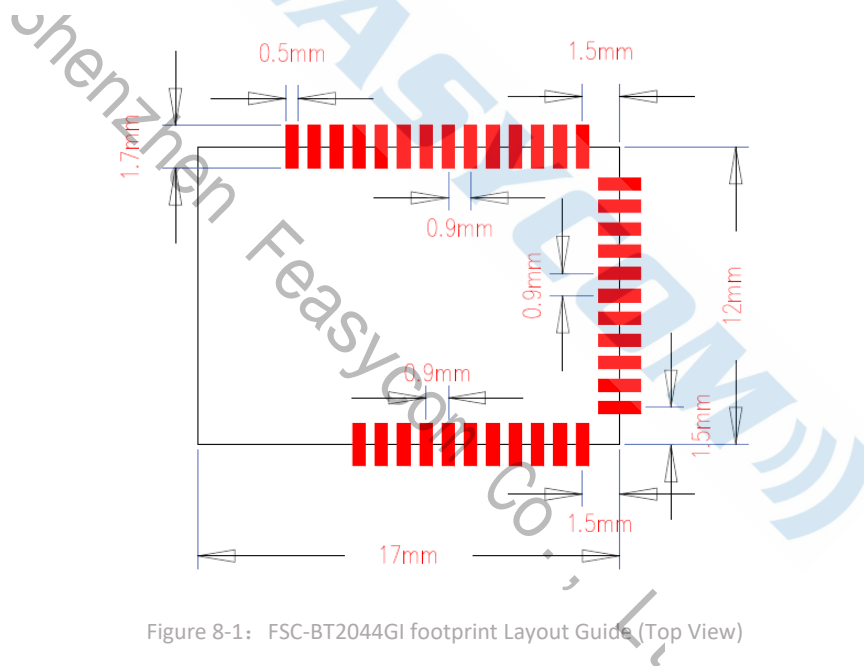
FSC-BT2044GI footprint Layout Guide (Top View)
